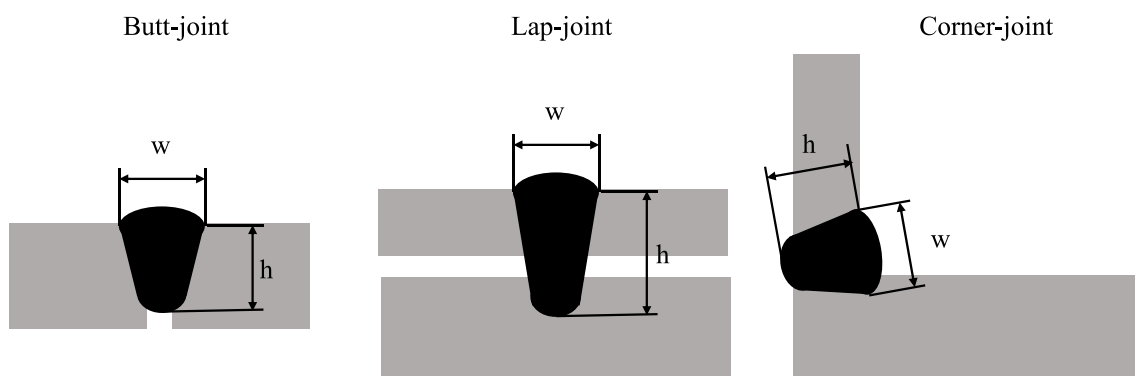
The measurement of the main geometrical attributes, weld width (w), and weld depth (h) schematically shown for each weld joint type
